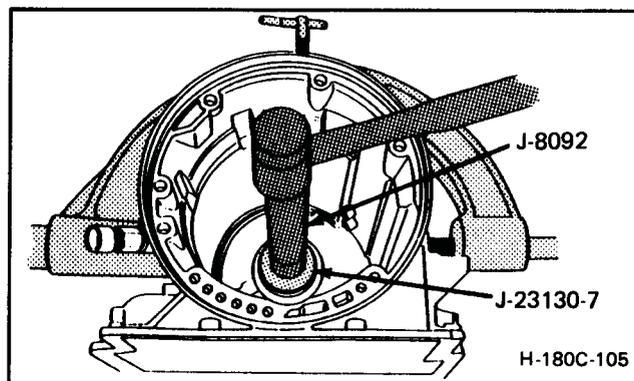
C-106 Installing the Reaction Sun Gear Drum Bushing Sleeve
